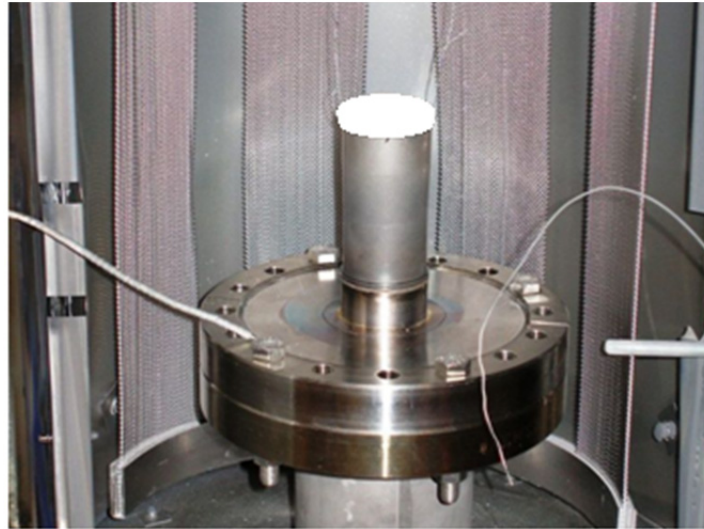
SN18 in vacuum de-brazing furnace: Heating up to 1100 °C along with 70 lb of tensile force failed to separate SN18 from the permeometer flange brazed to the rejector end.
